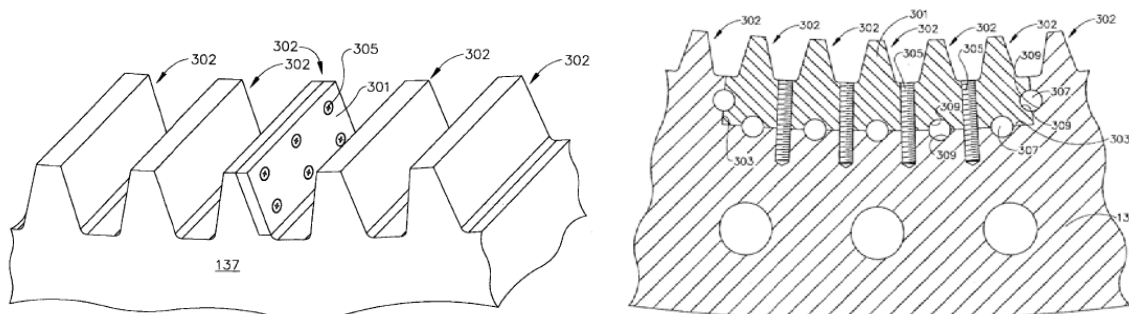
Schematics of a reinforcement of the tooth in the bearing gear from Dimascio et al. [18]
